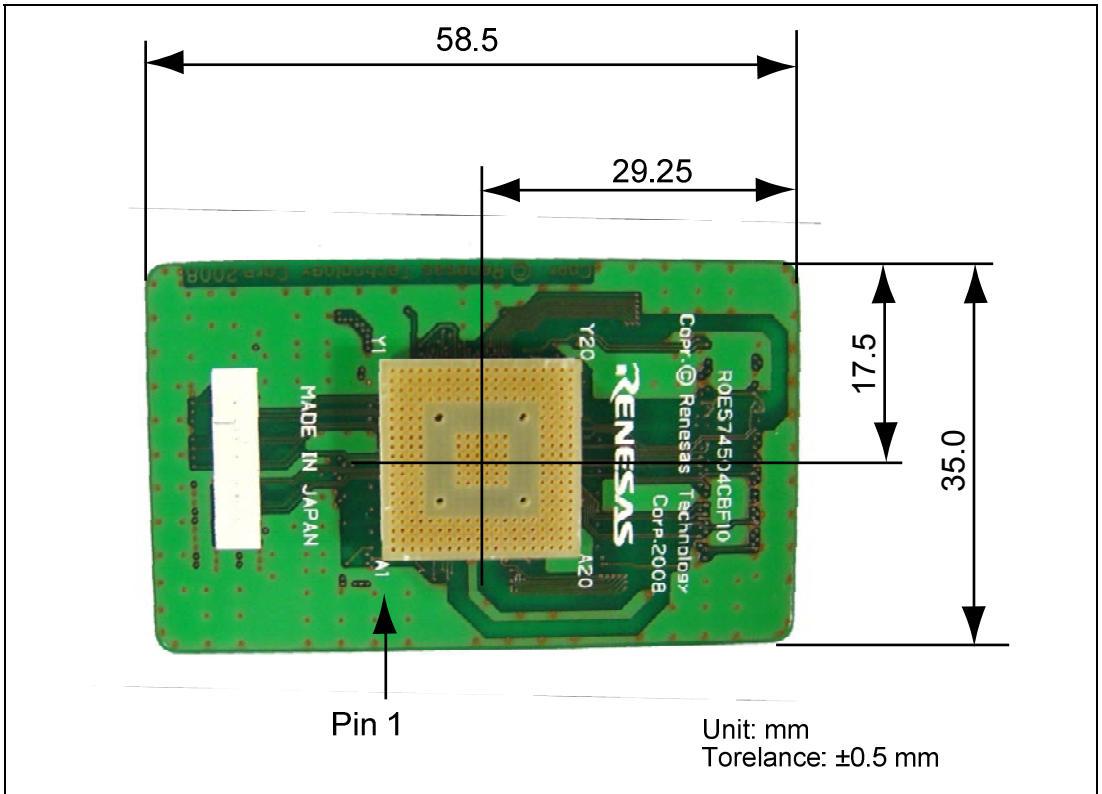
External Dimensions of the User-System Interface Board (R0E574504CBF10)
